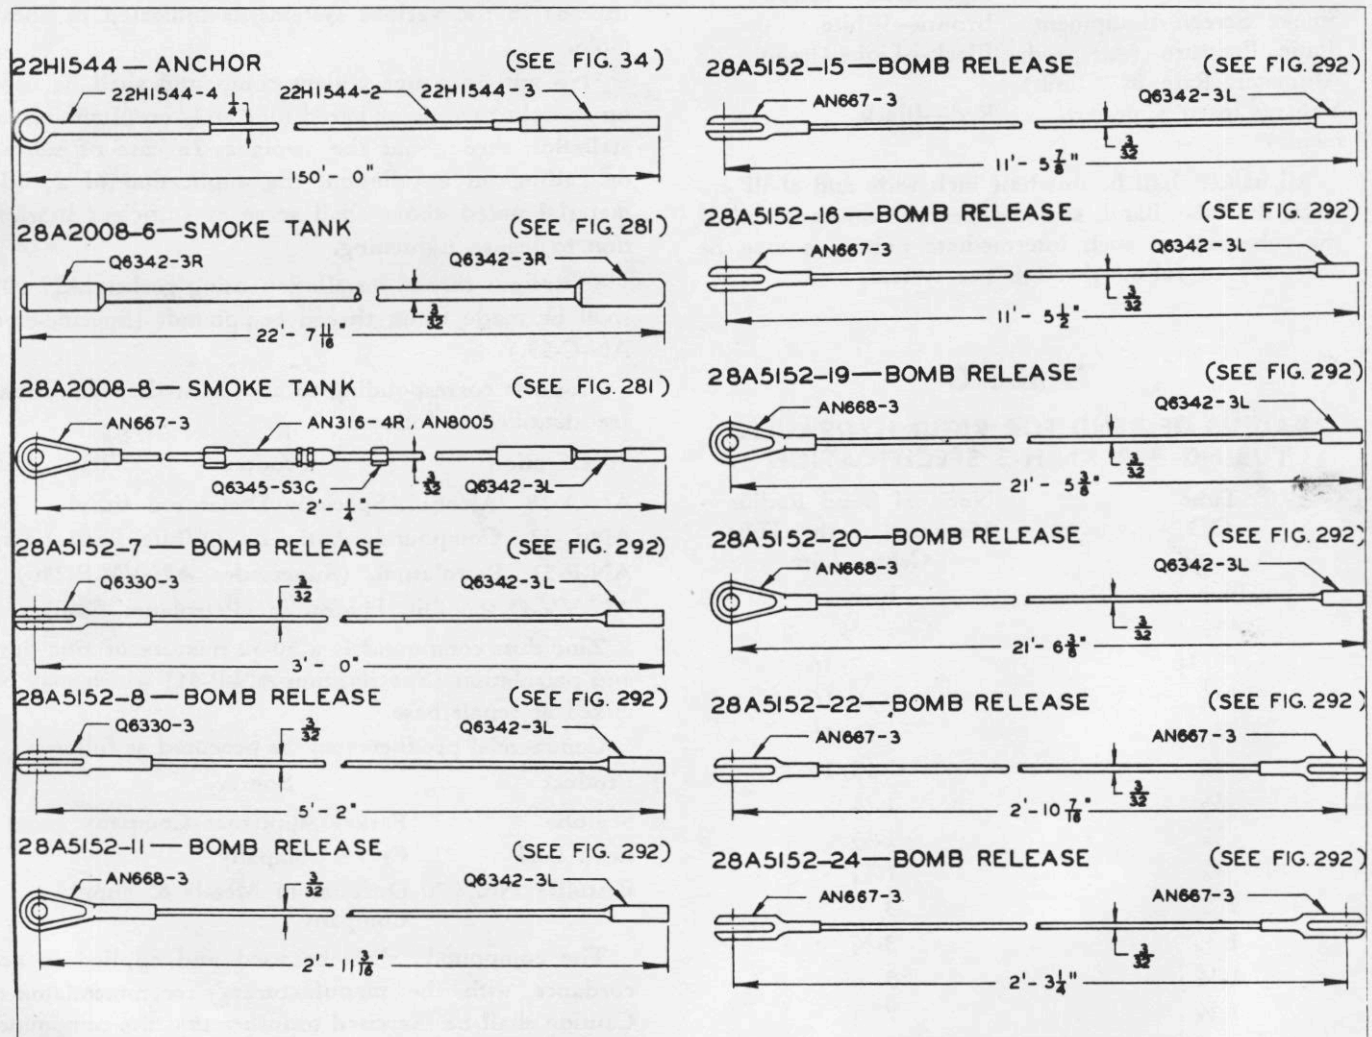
(Sheet 1 of 14 sheets)—Flexible Cable Chart
